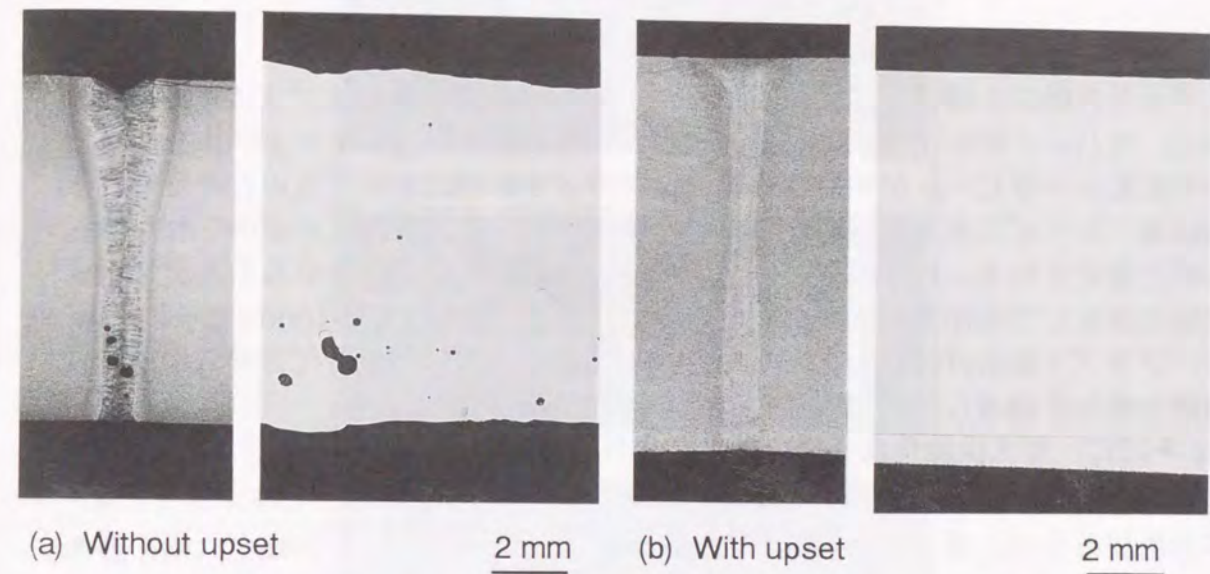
Longitudinal and transvers macrosections of laser weld metal with and without upsetting
